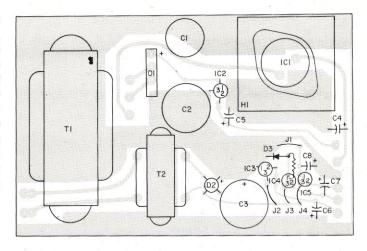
Component placement on the component side of the PC board for the supply using three-terminal regulators.
